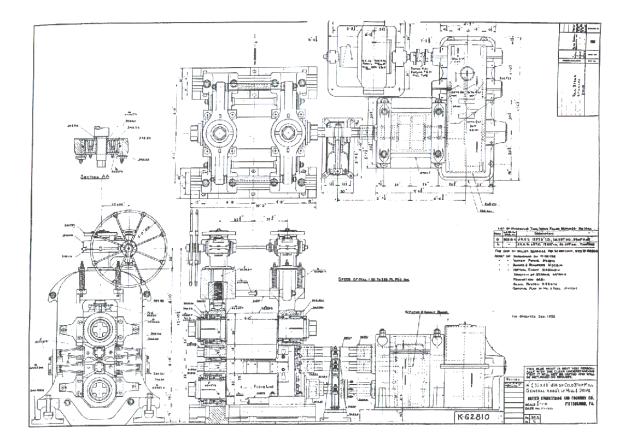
The original four high wide strip mill stand for Rome Brass designed by United Engineering and Foundry Company of Pittsburgh with roller bearings from William Messinger's Hydraulic Tool Company.
